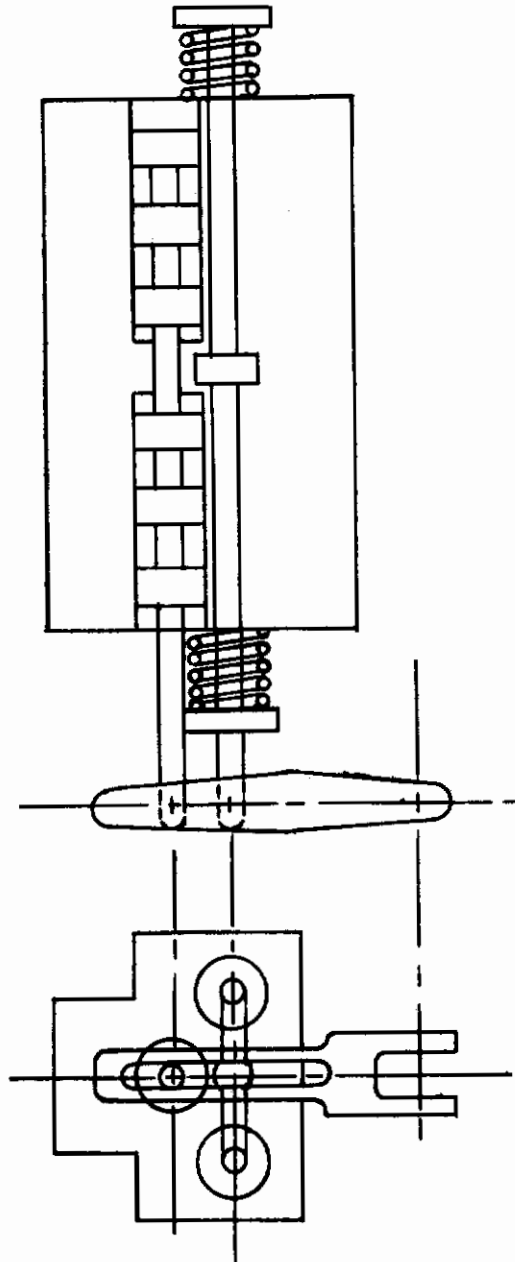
Elevon Actuator Valve Assembly - Mark II Design
